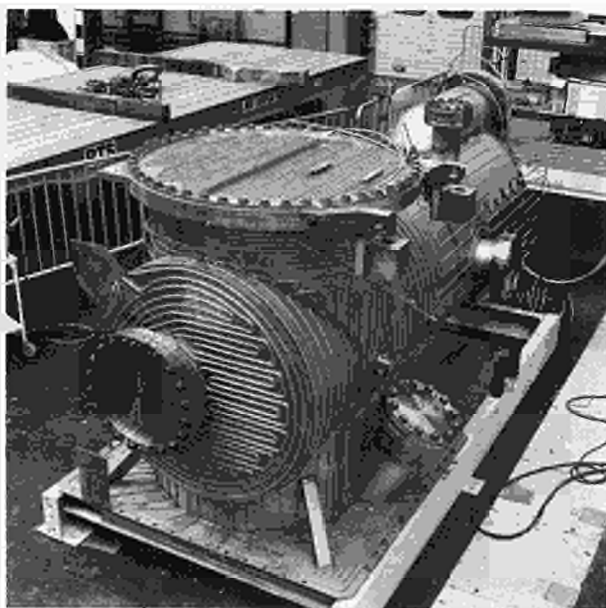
Installation of electrical heaters onto the Pumping Chamber.
